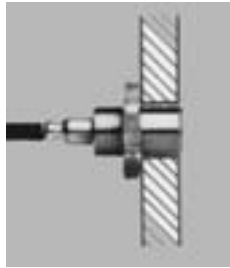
Example of flush assembly of a shielded sensor in a metal support
